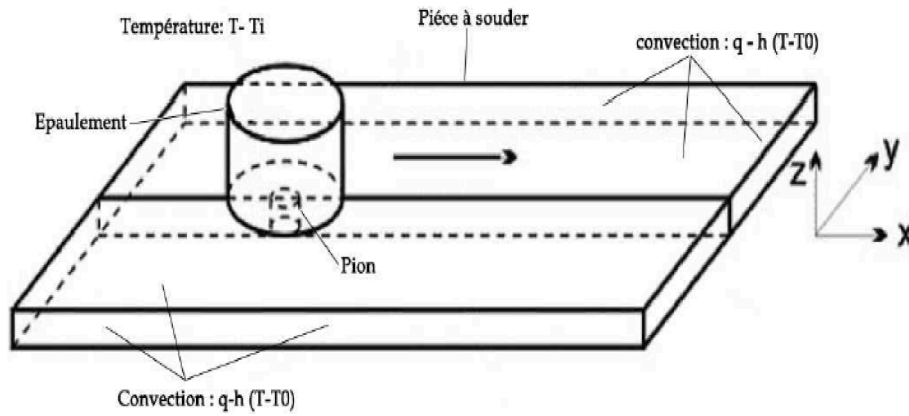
Diagram showing the initial and boundary conditions of FSW welding.
